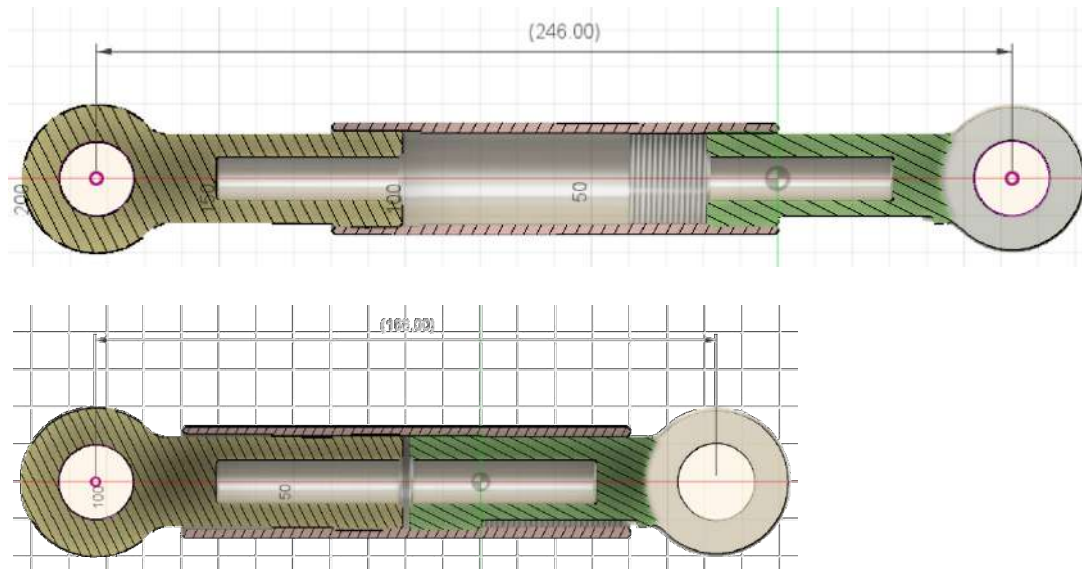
ADJUSTABLE TUBE LENGTH RANGE
